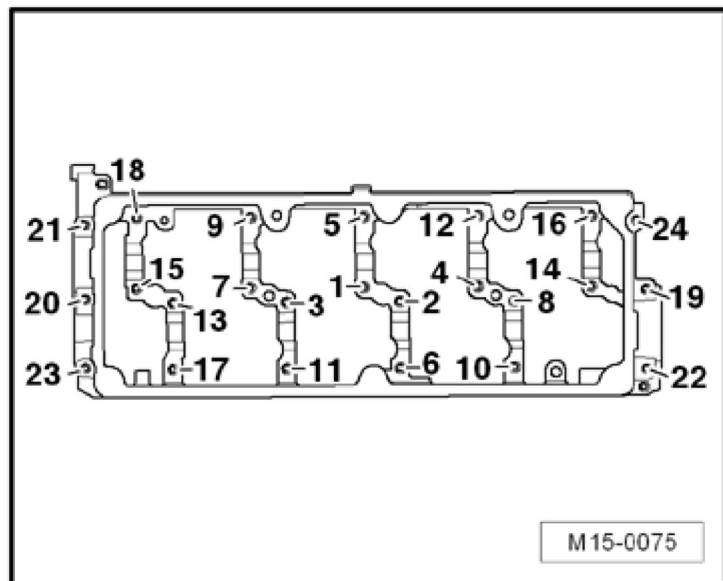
Identifying Bearing Frame Bolts Removal Sequence -24 Through 1-
